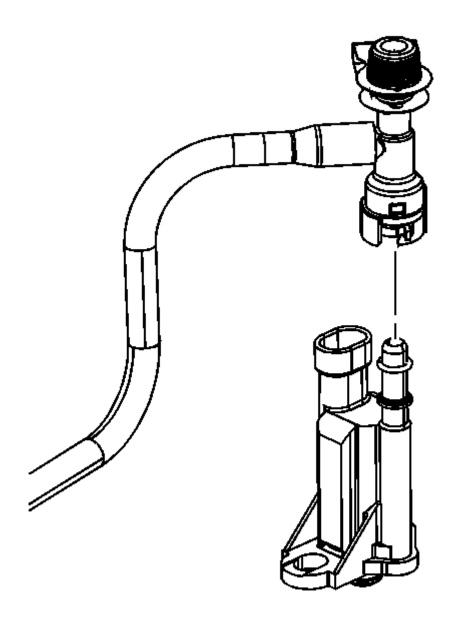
Evaporative Emission Canister Solenoid Valve & Harness Courtesy of GENERAL MOTORS CORP.
